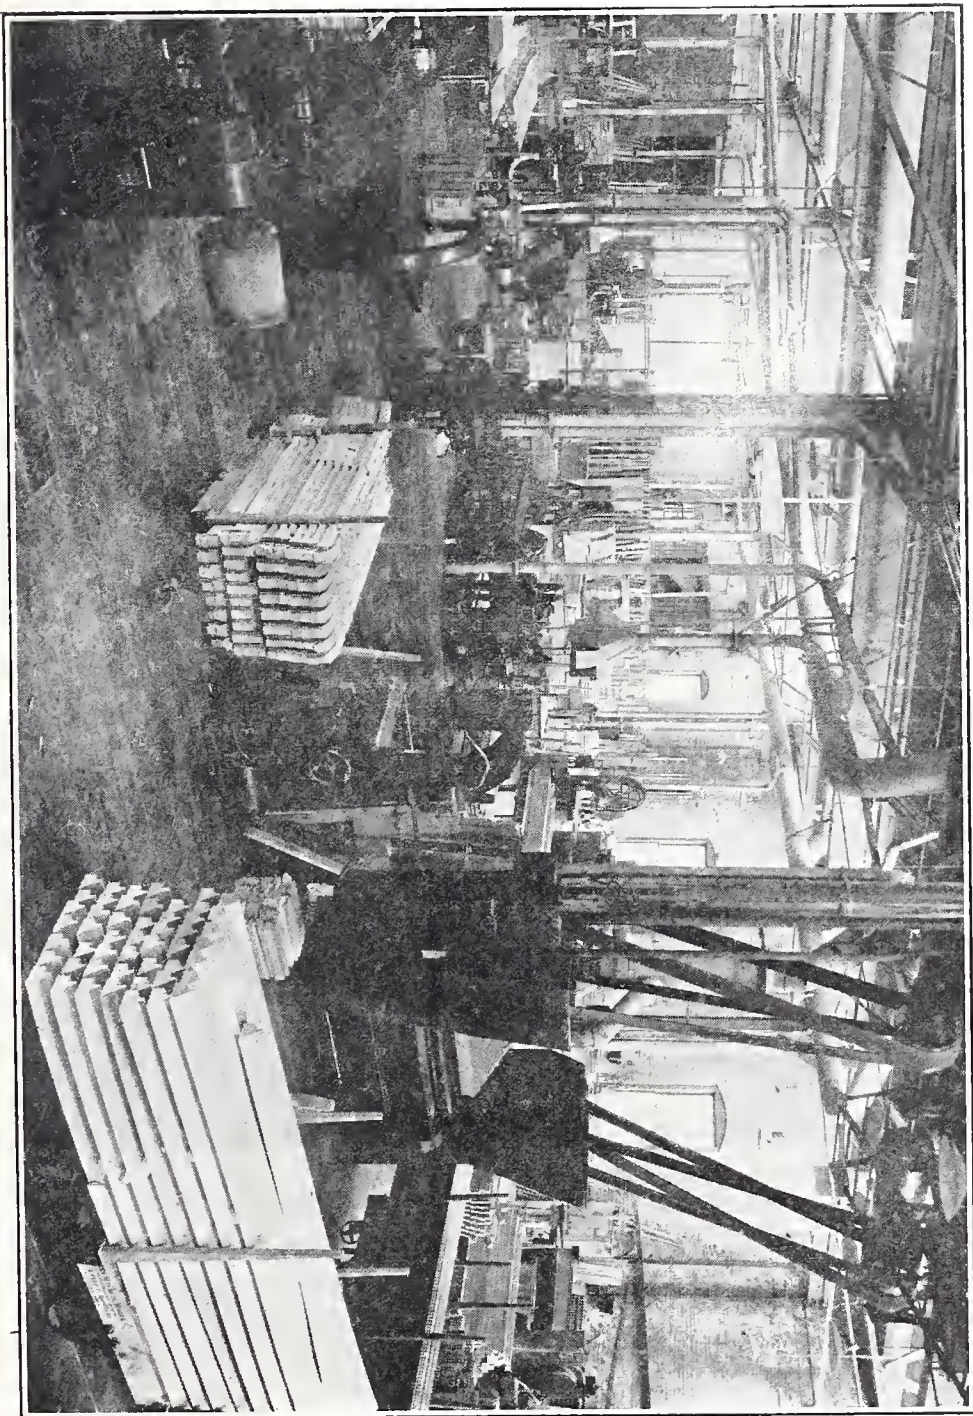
Partial view of wood machine room, showing guarded planer, wood boring machine, drum sanding machine, scroll saw, jointer, etc.
